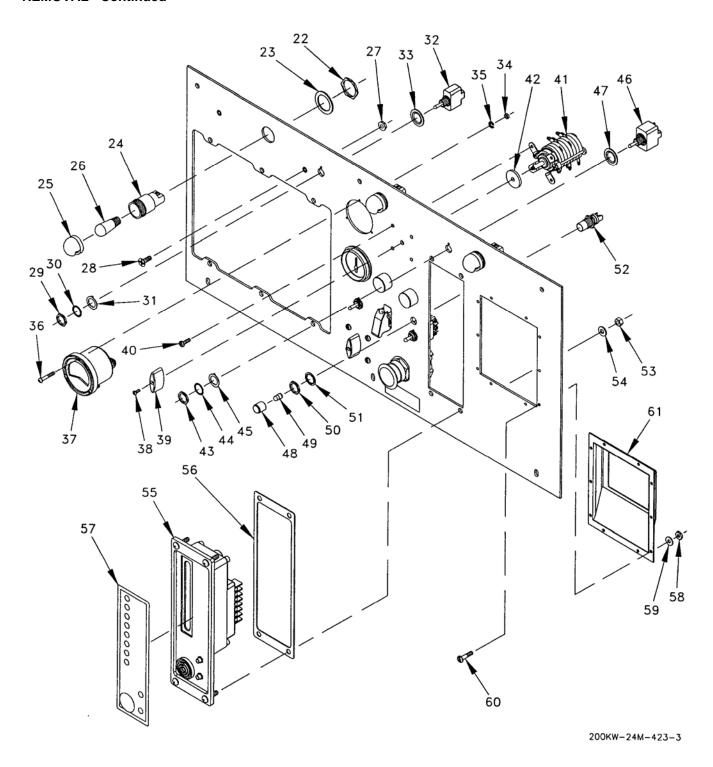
Control Box Panel Assembly (Sheet 3 of 4).
